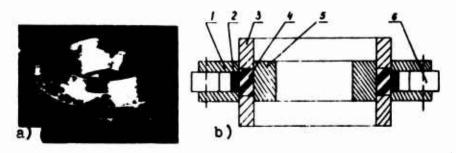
Device for testing interior pressure. a) overall view; b) loading scheme: 1 - external plates; 2 - sample; 3 - pressure rings; 4 - rubber ring; 5 - interior ring; 6 - spacer layers.
